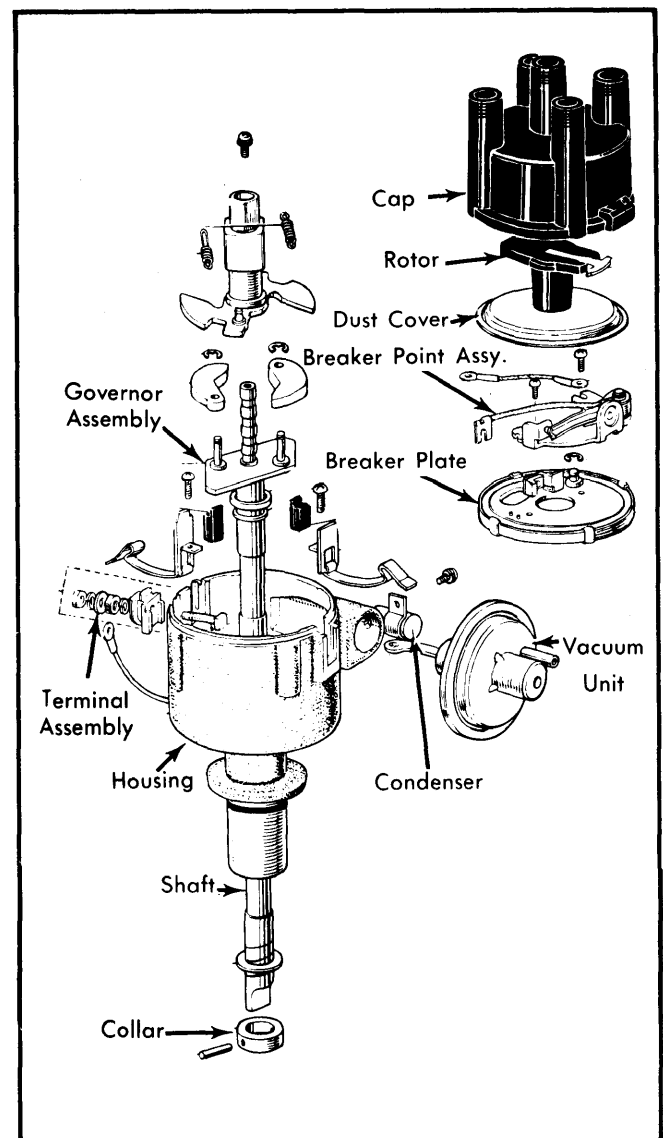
Disassembled View of Nippondenso Breaker Type Distributor
